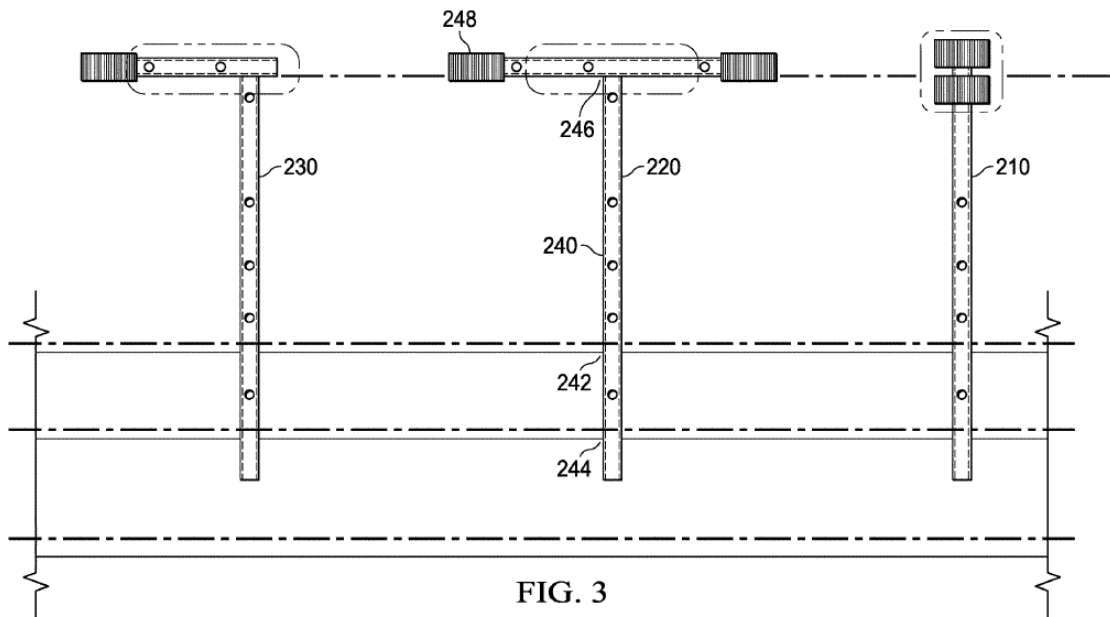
above shows light units 210, 220, and 230, which may include mounting pole 240, bracket for a top rail 242, bracket for a bottom rail 244, cap 246, and light fixture 248. *Id.* at 2:63–65. The bracket for top rail 242 and bracket for bottom rail 244 may be used to attach light mounting pole 240 to rails 205 of a crown deck (dashed lines) of a drilling rig using U-shaped bolts or straps. *Id.* at 2:63–3:1.
